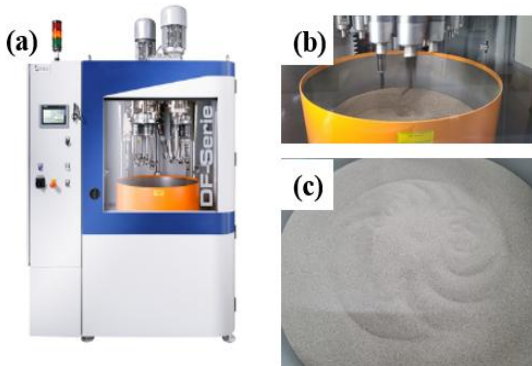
Equipment for drag finishing : (a) Drag finishing machine (b) Holder (c) Abrasive media
